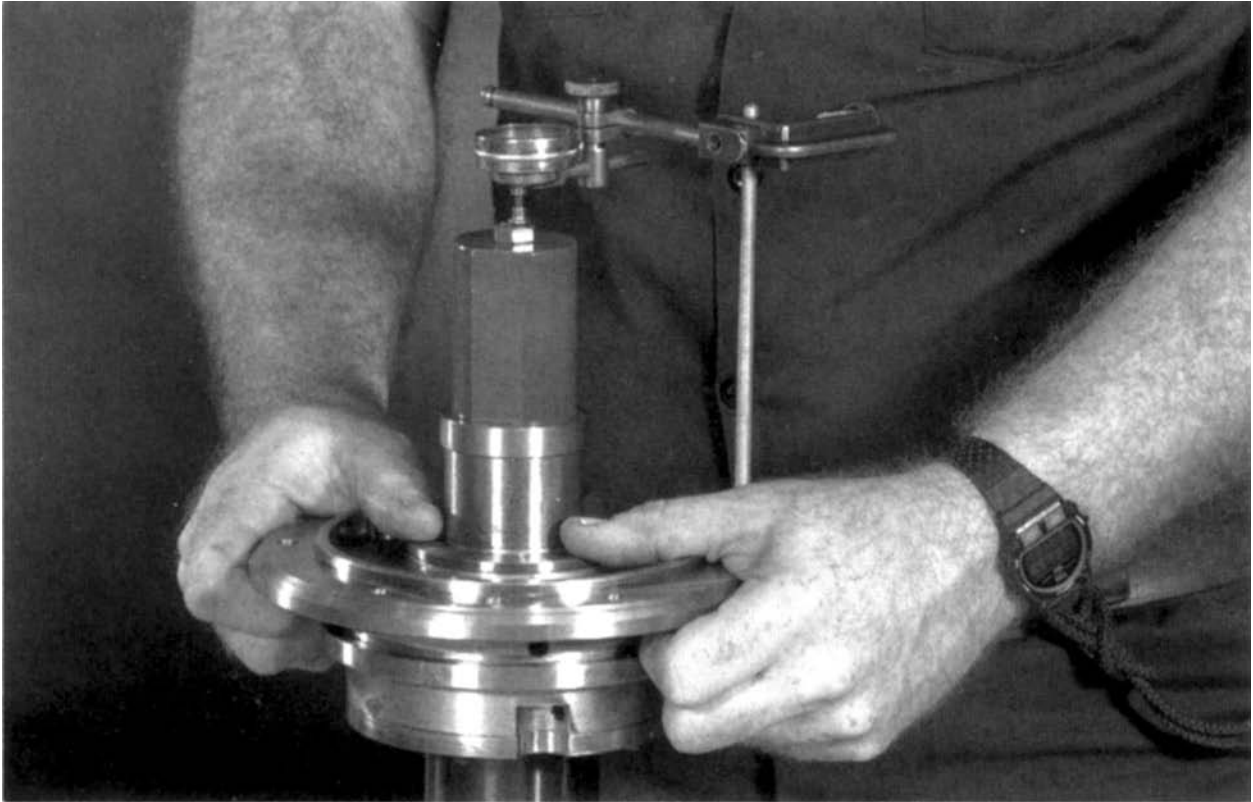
Checking the Thrust Clearance of the High Speed Assembly
